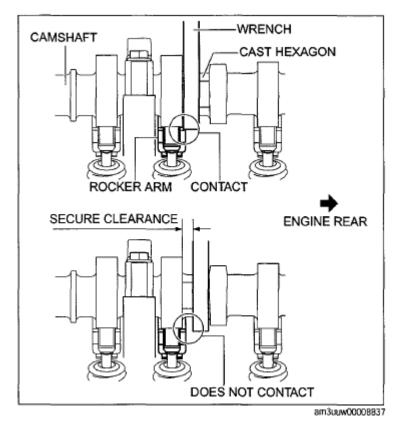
Securing Clearance Between Cam And Rocker Arm
